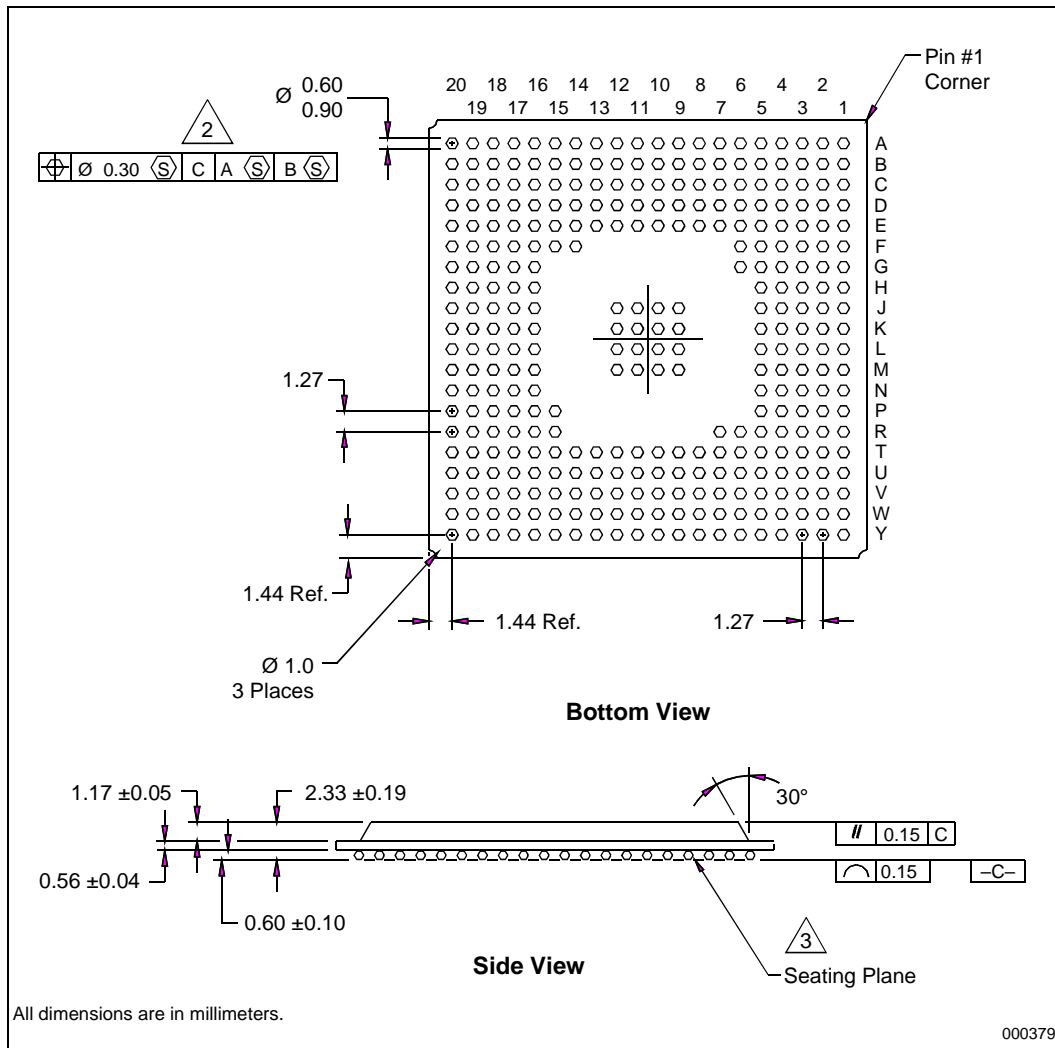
324-ball BGA Package Dimensions – Bottom and Side Views
